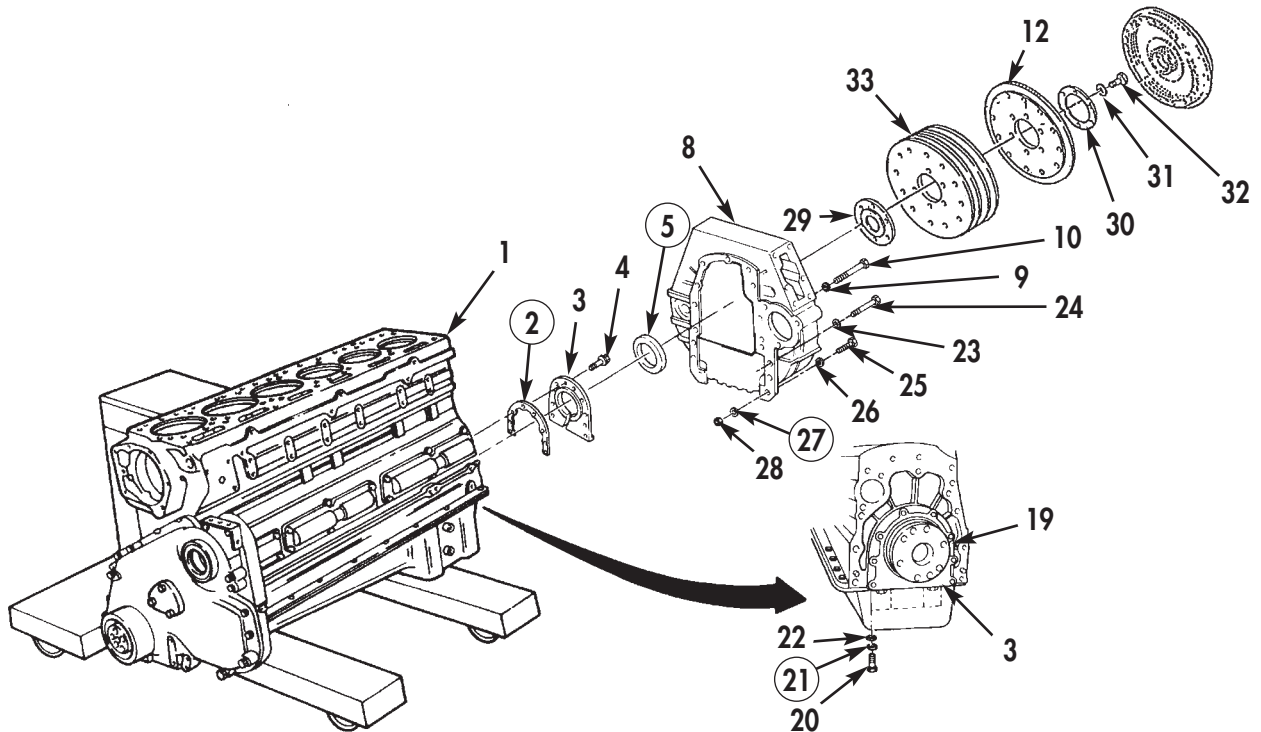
Flexplate and Flywheel Removal (Big Cam III).
